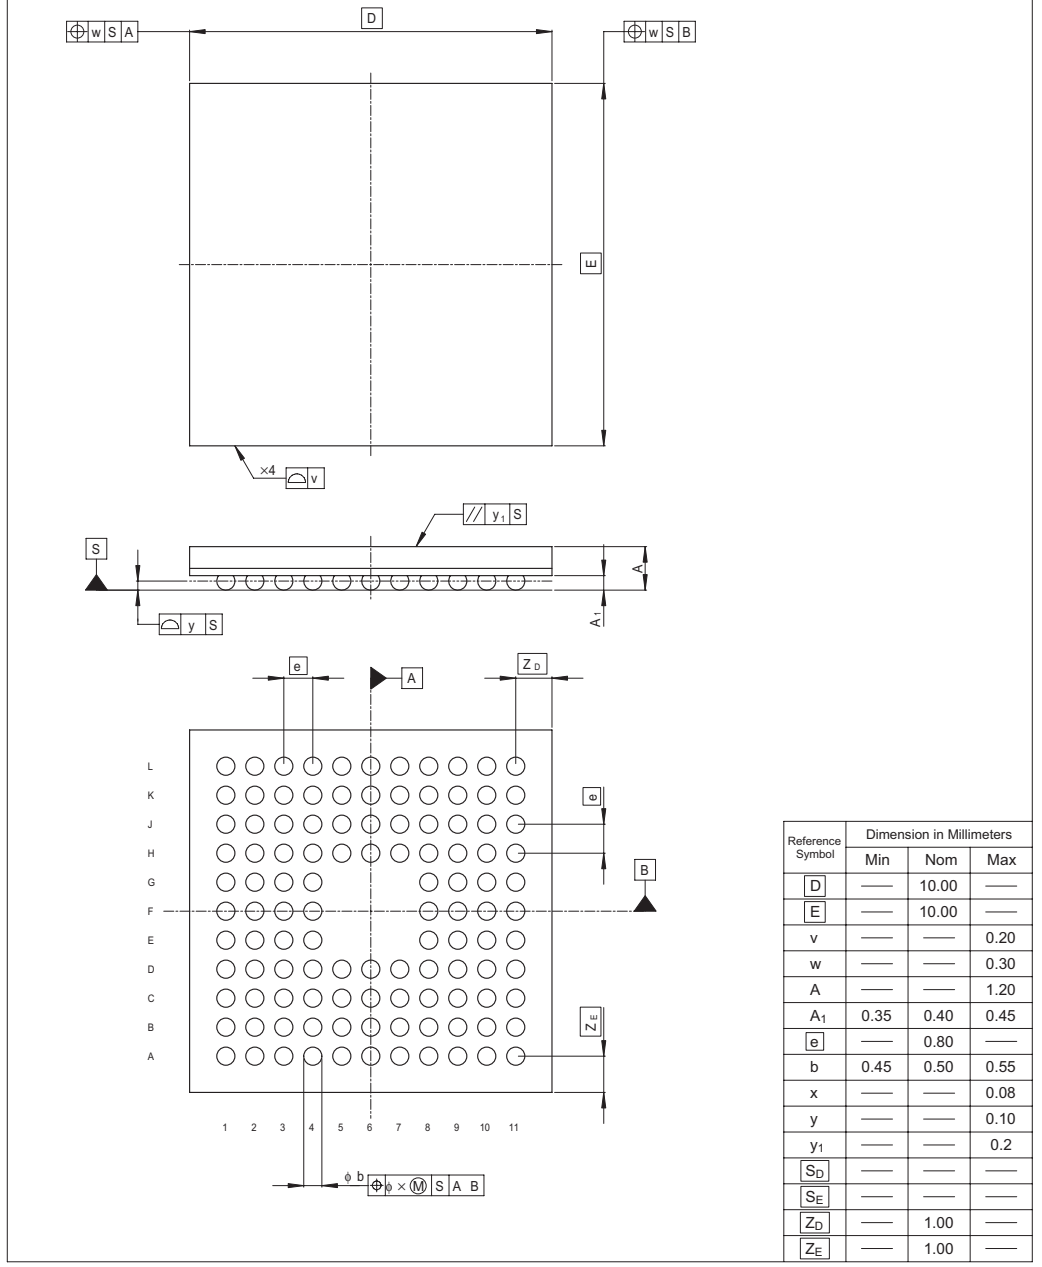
TBP-112A, TBP-112AV Package Dimensions
